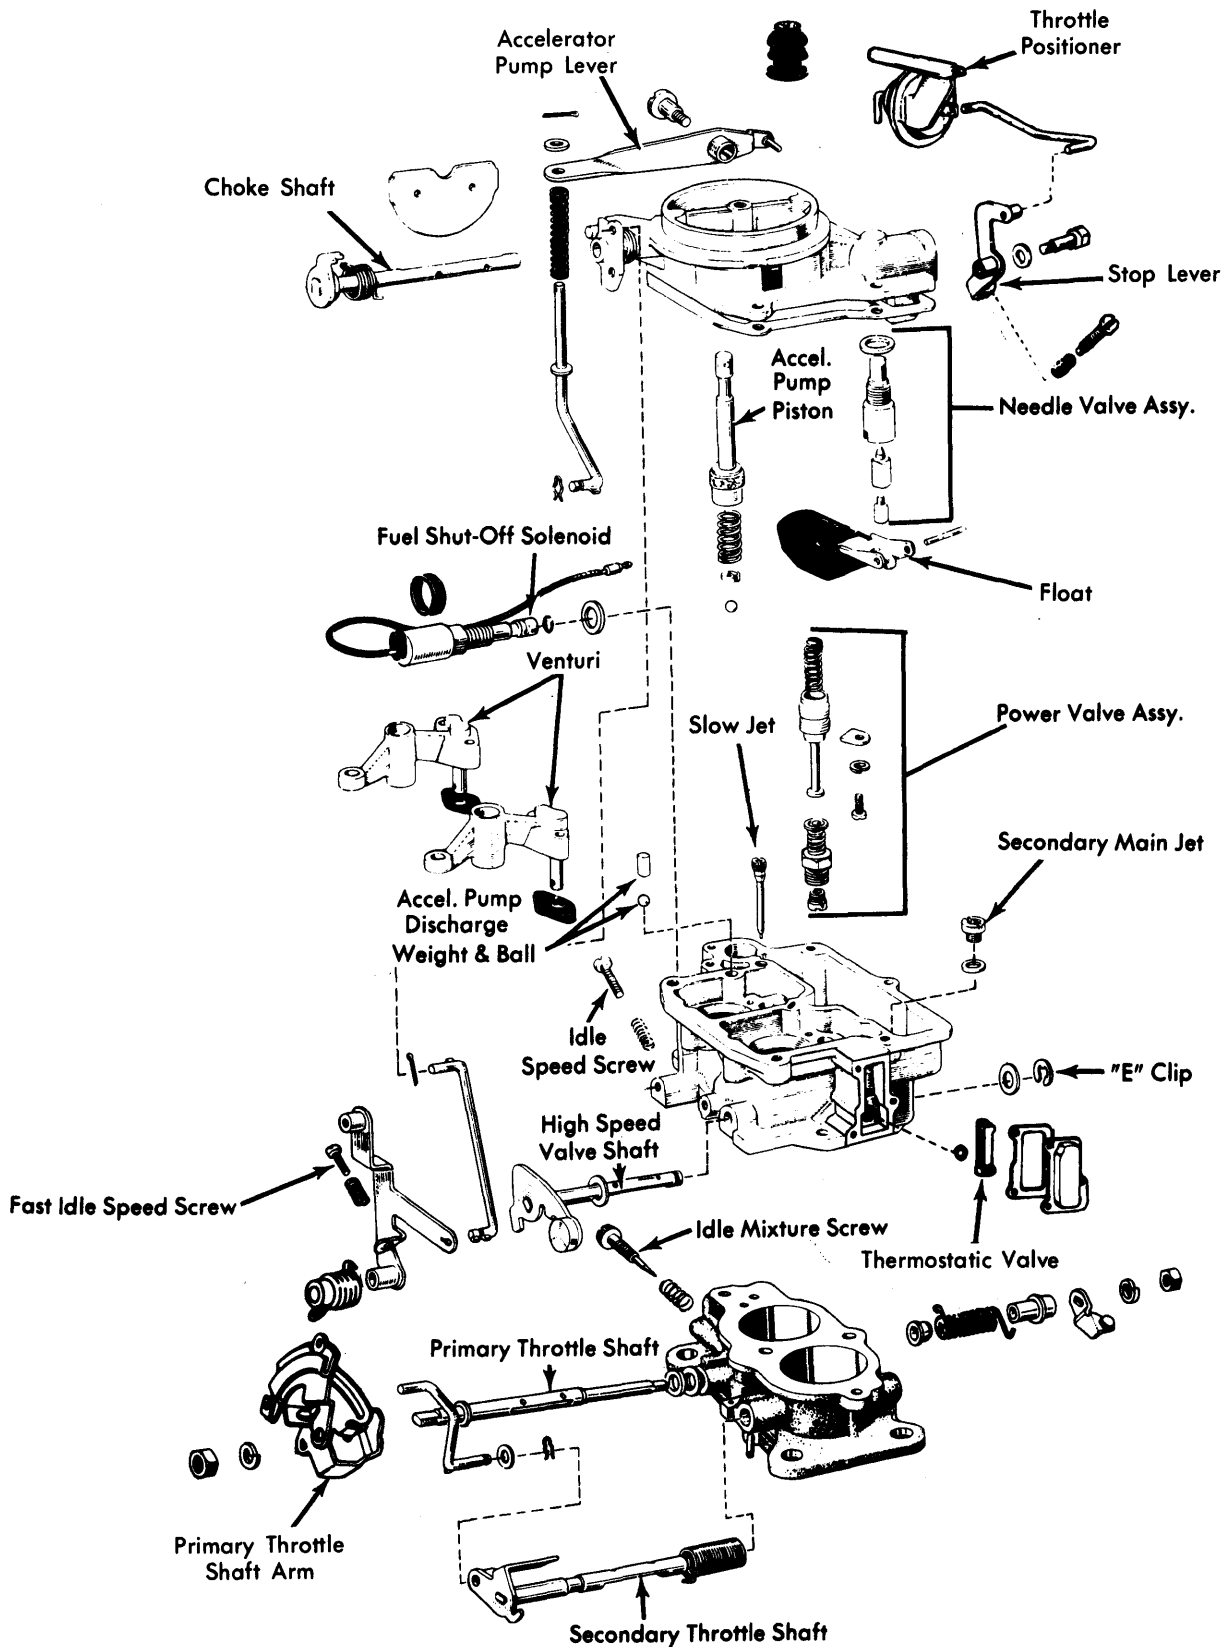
Exploded View of Aisan 2-Barrel Carburetor (Toyota 3K-C Engine)
